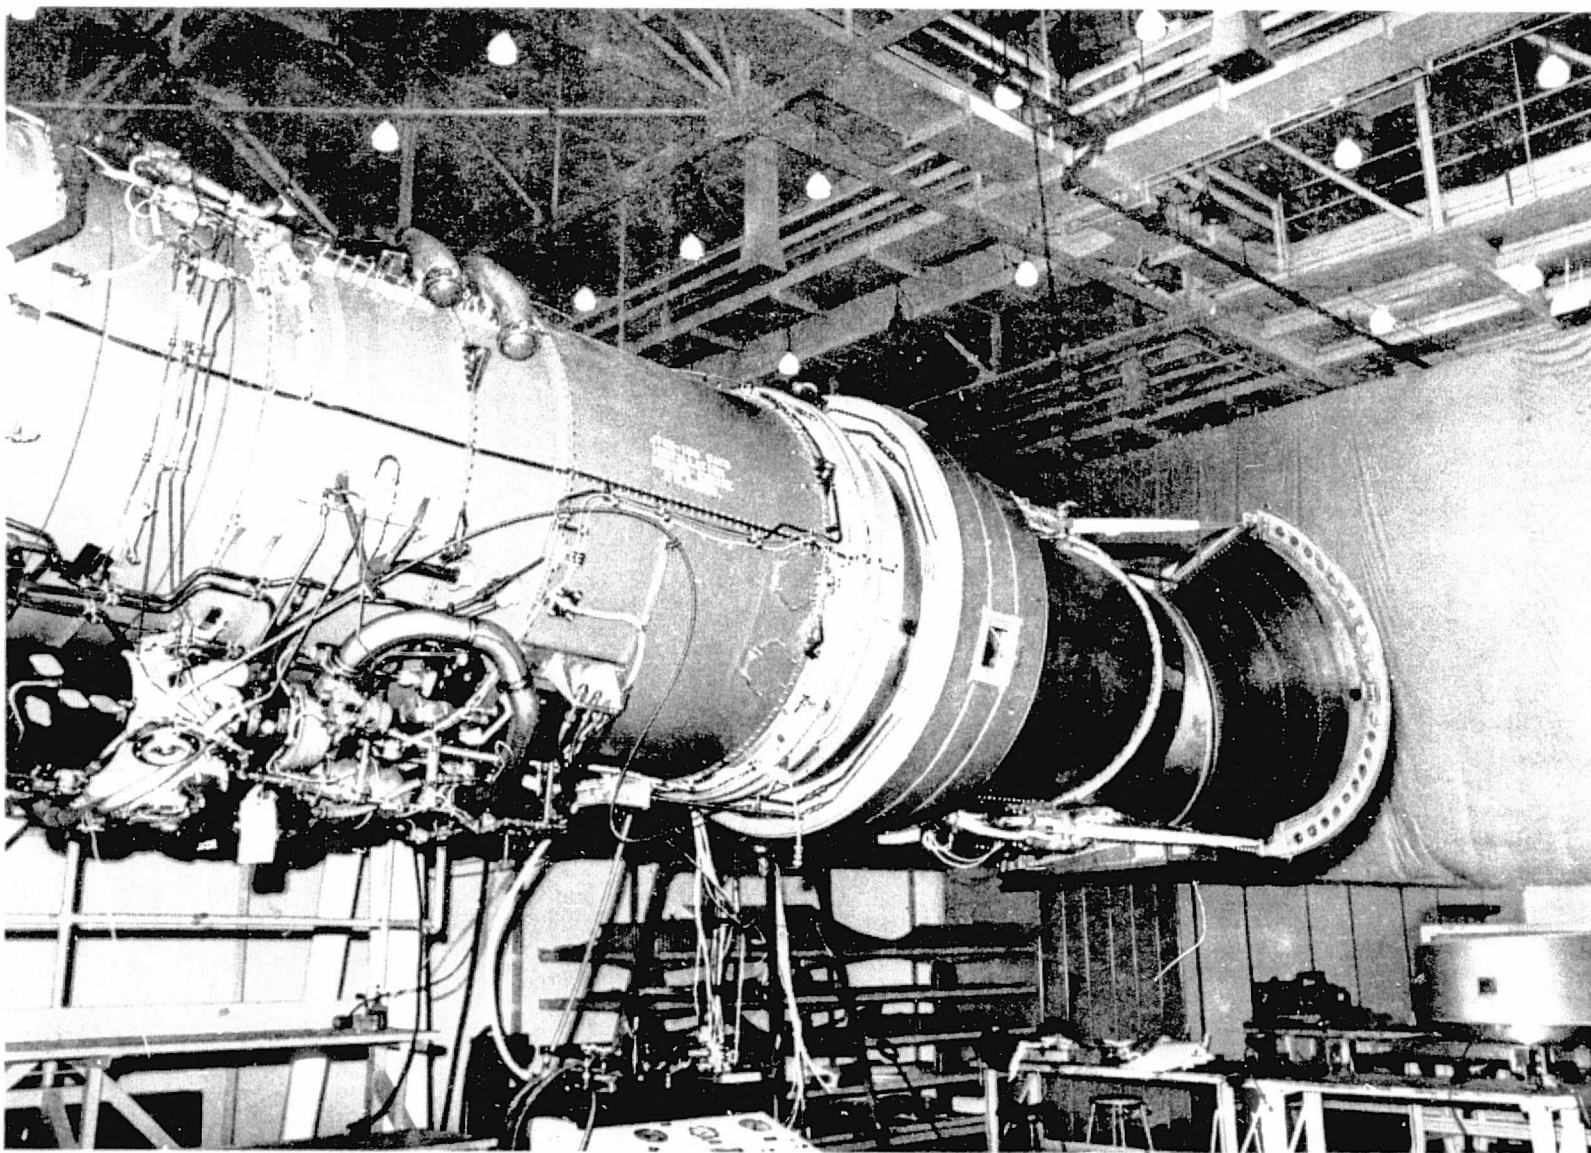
MOCKUP ENGINE -- THRUST REVERSER HORIZONTALLY MOUNTED
